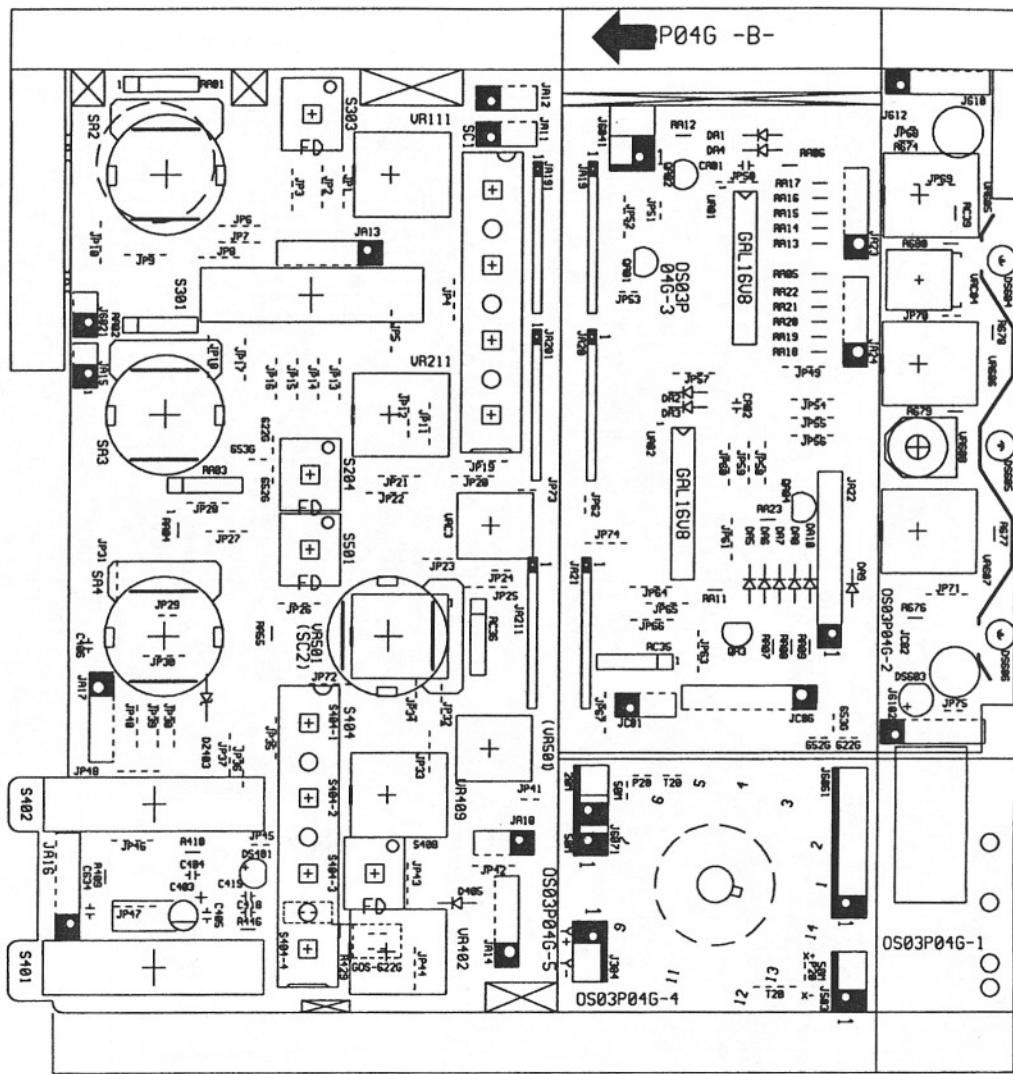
The silkscreen side layer of the OS03P04G-4 PCB
